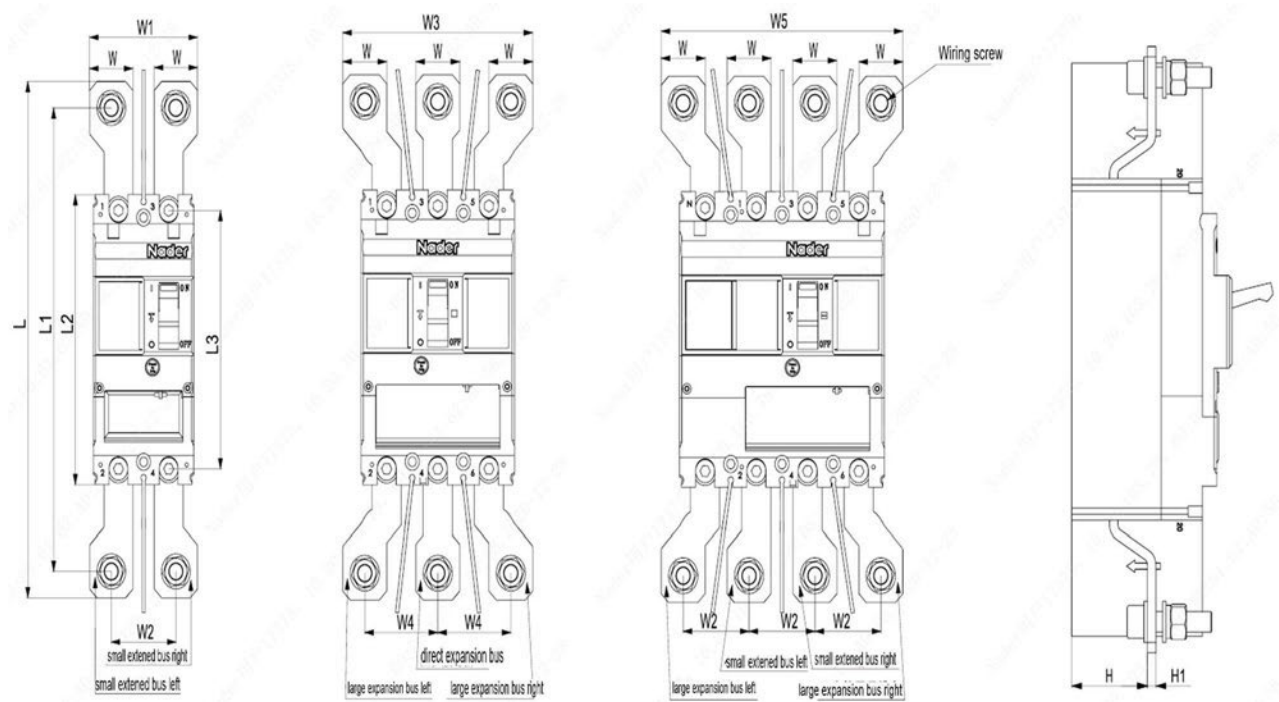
2P、3P、4POutline and installation dimensions of expansion wiring in front of the board
